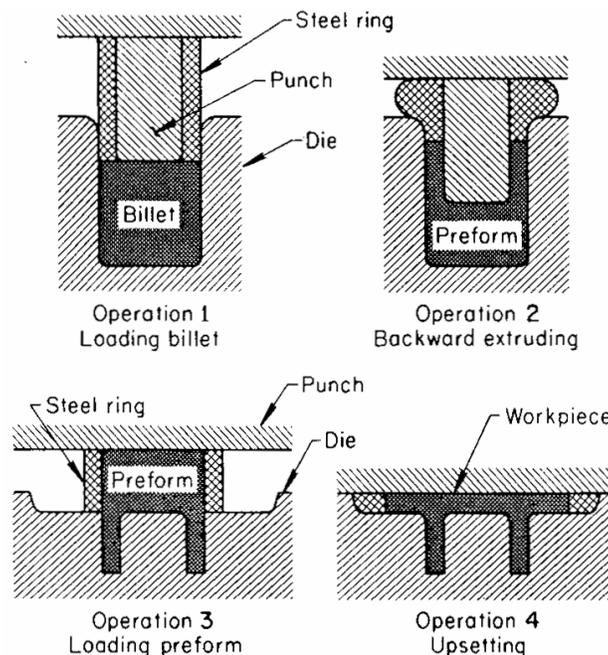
Backward extruding and upset forging of a beryllium part using a deformable steel ring to support the billet during forging.¹⁹
